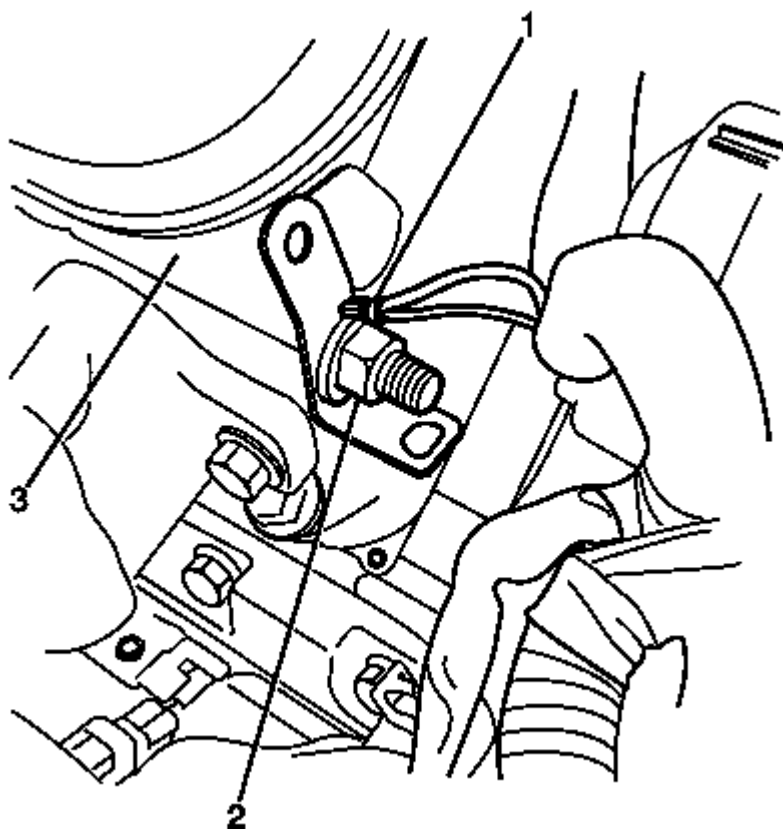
Locating Wiring Harness Ground, Cylinder Head & Stud
